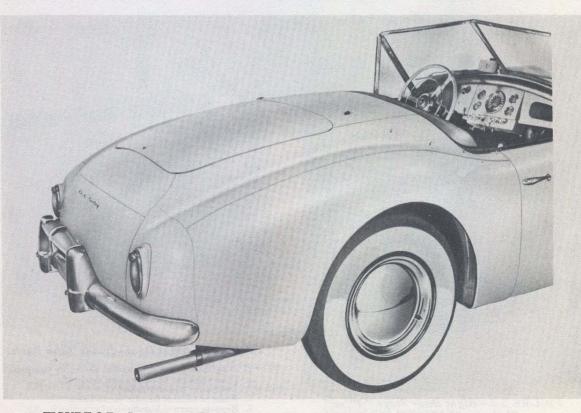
B-Location of Weld Joints at Front, Rear and Sides of Rear Deck Opening.
